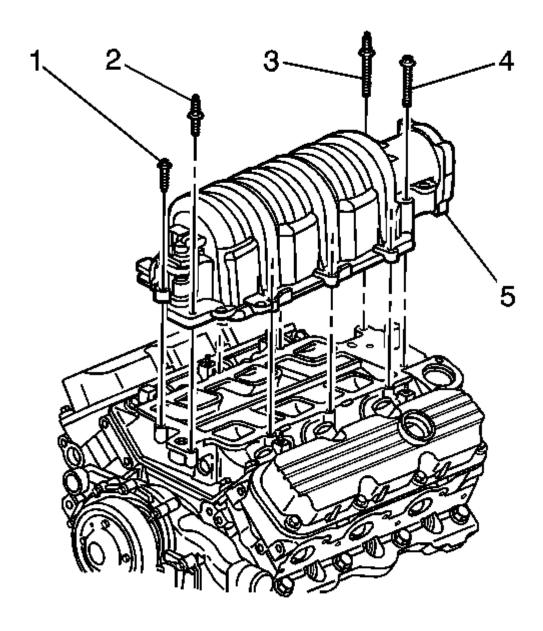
Upper Intake Manifold Bolts & Studs Courtesy of GENERAL MOTORS CORP.
